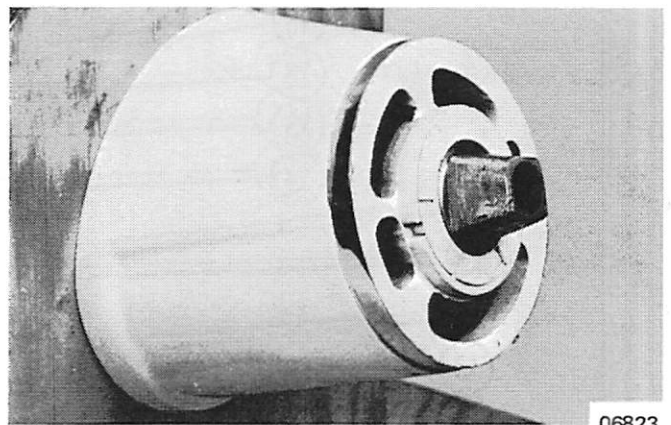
Steering Wheel Shaft Installed - 20° and 90°
